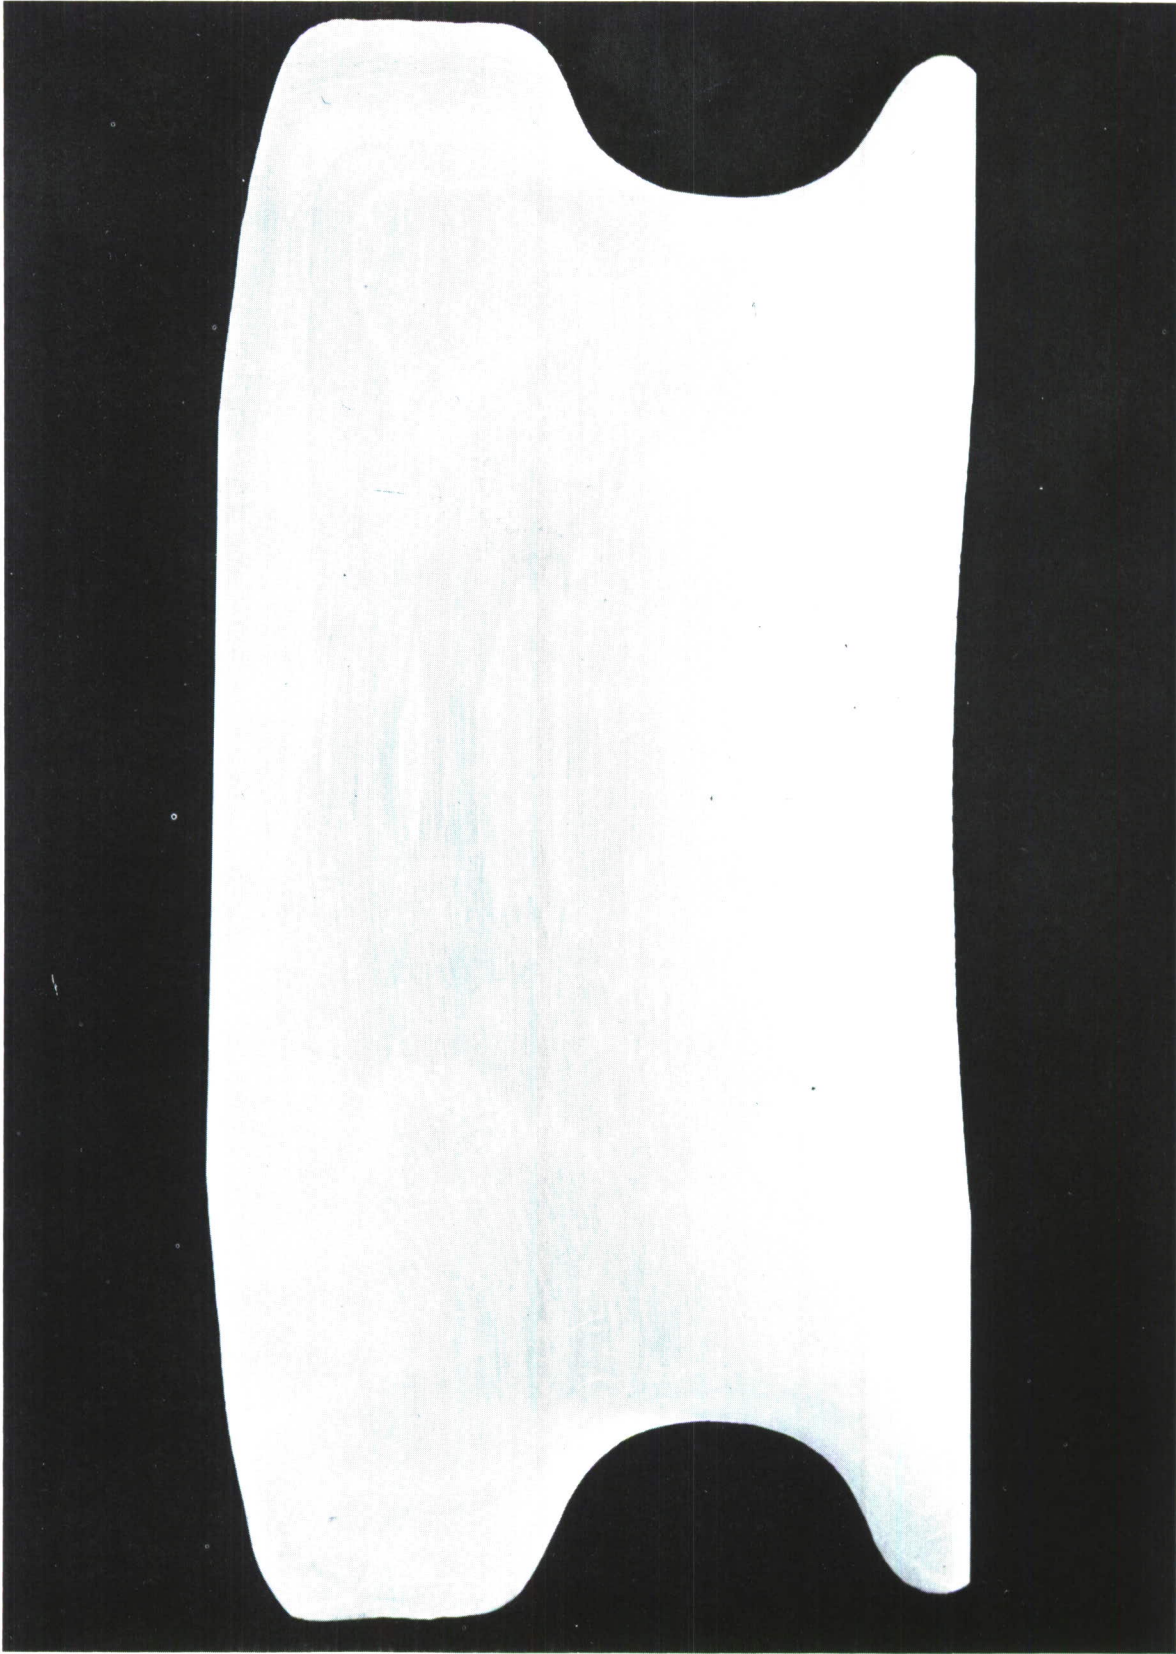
IMI 679 Longitudinal Section Through Forging Center Section
